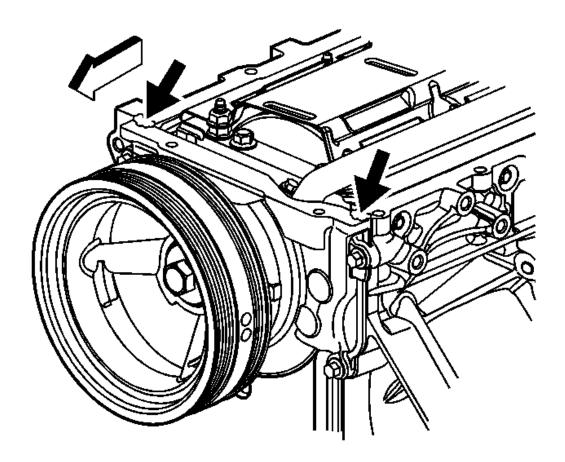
View Of Sealant On Engine Front Cover Gasket Tabs Courtesy of GENERAL MOTORS CORP.
